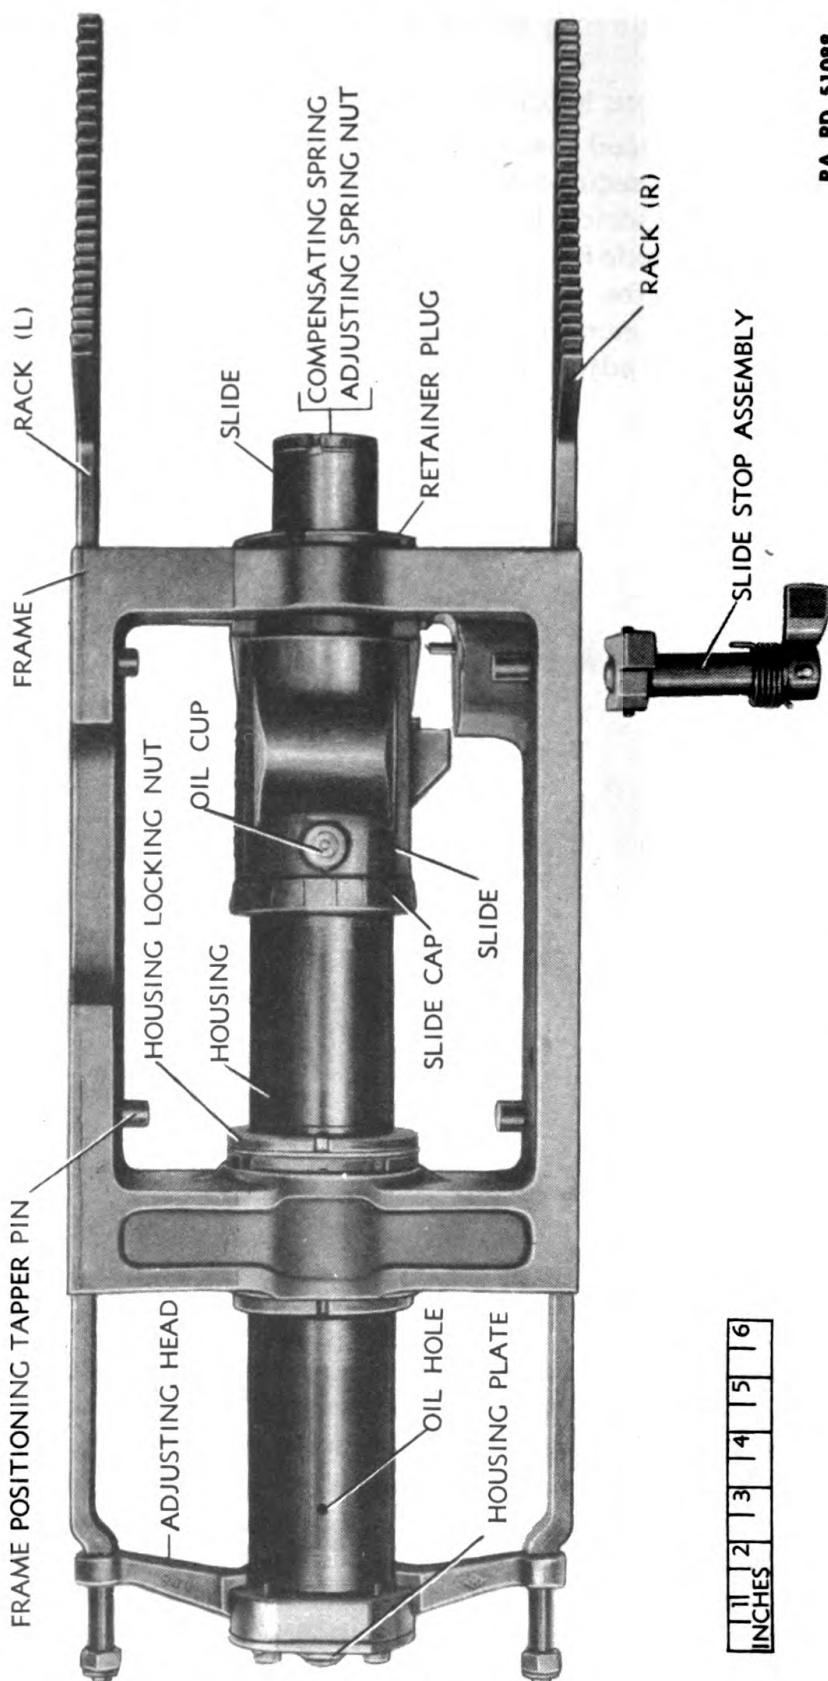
Lower Recoil Mechanism Group With Slide Stop Removed –
